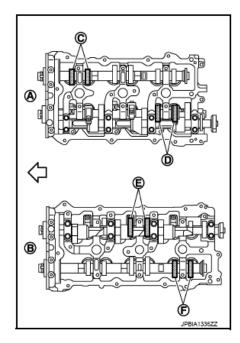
Locating Valve Clearances Measurement Areas Courtesy of NISSAN NORTH AMERICA, INC.
